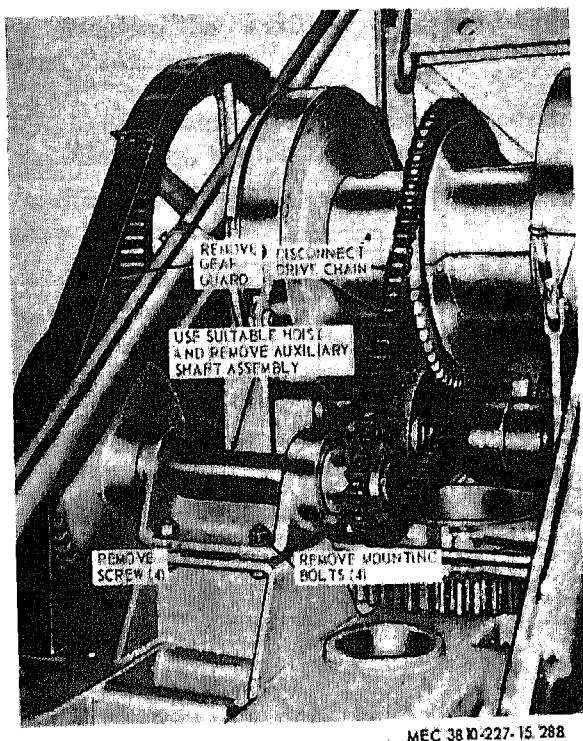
Crane auxiliary shaft assembly, removal and installation.
